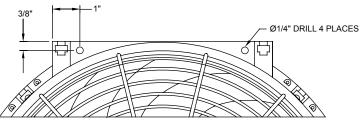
FOR USE WITH 13" FANS (4) 1/4" HOLES MUST BE DRILLED IN FAN SHROUD
